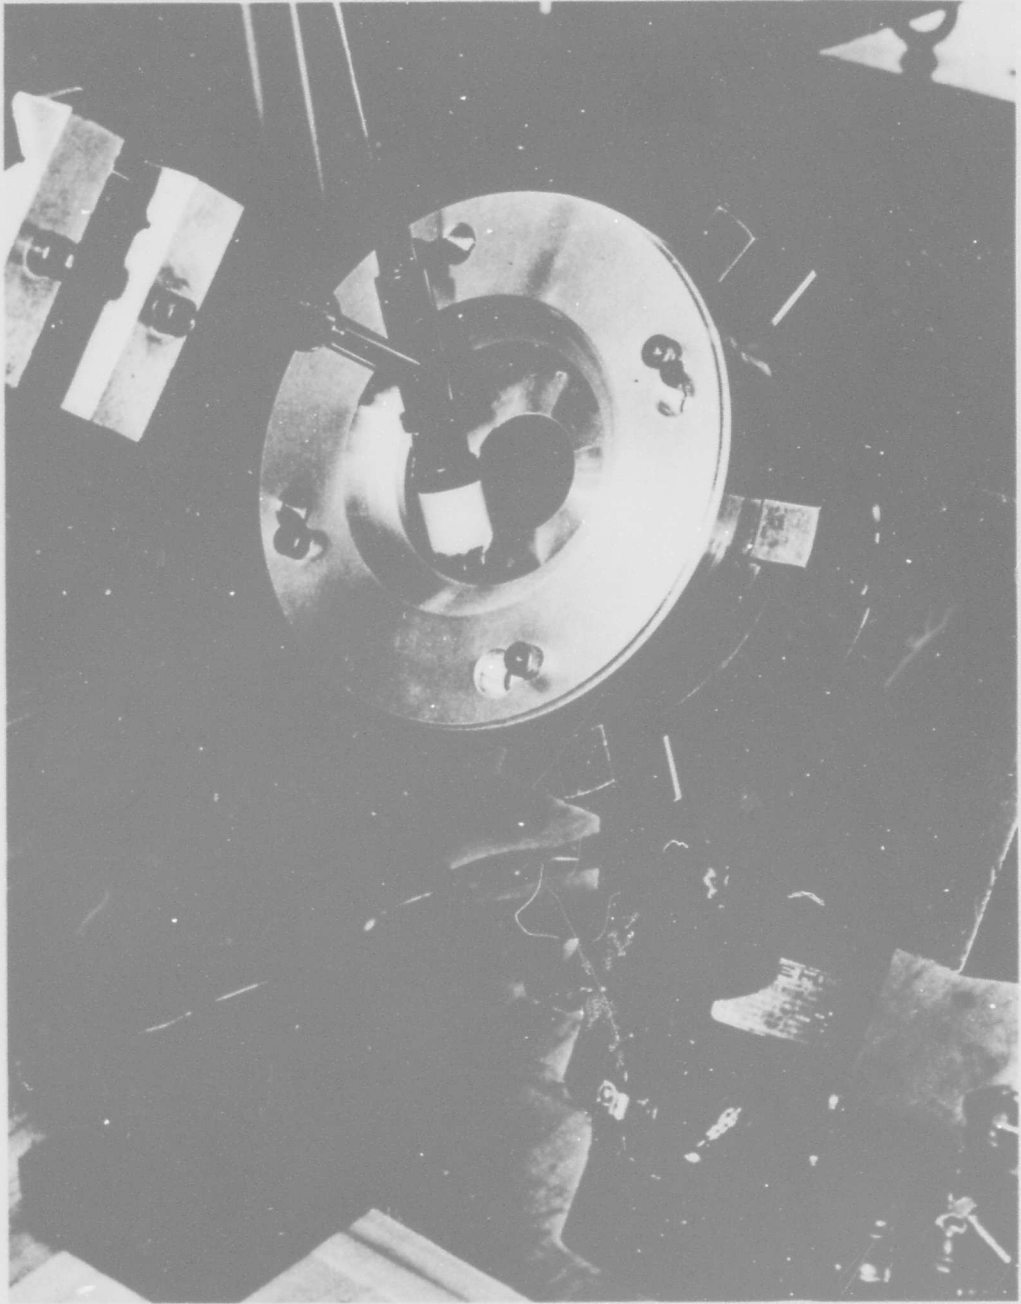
SETUP FOR MAKING AN INNER CONVOLUTION WELD
